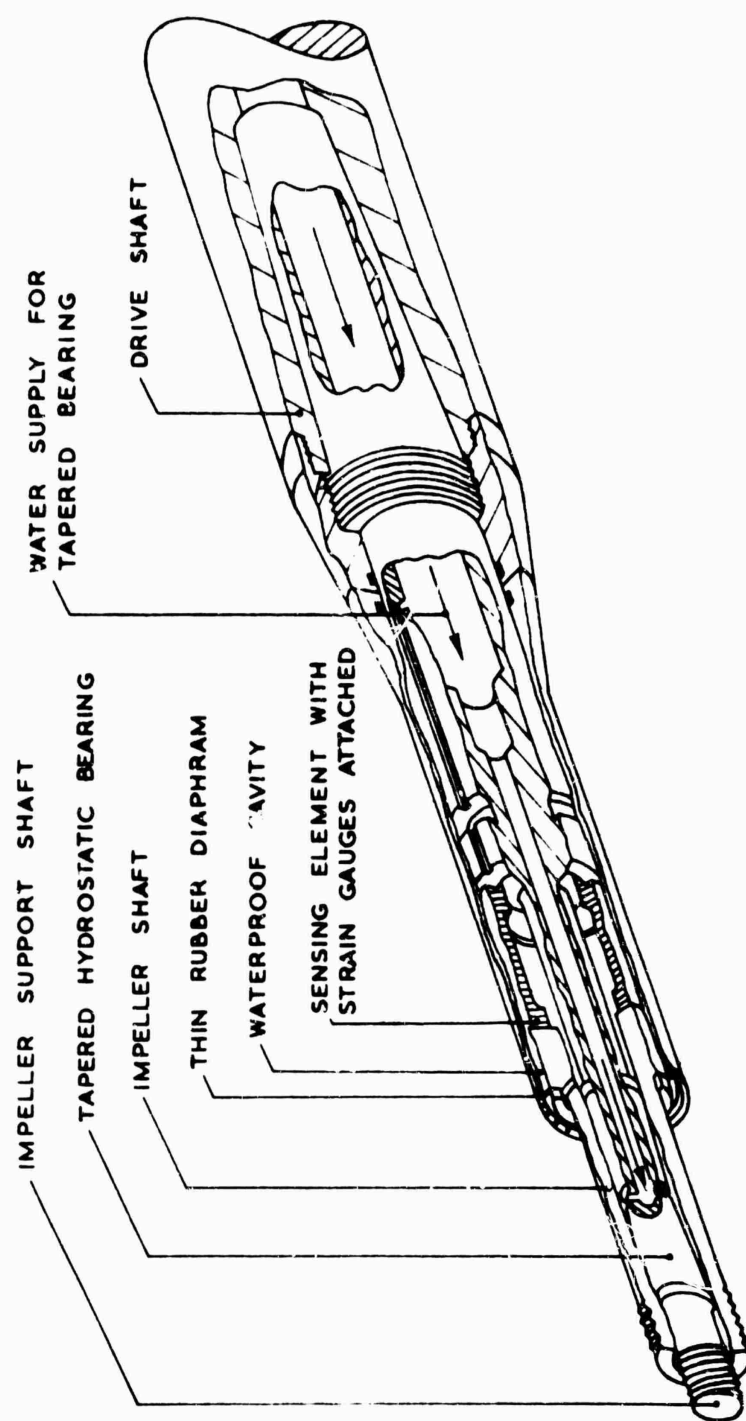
CROSS SECTION OF DYNAMOMETER
